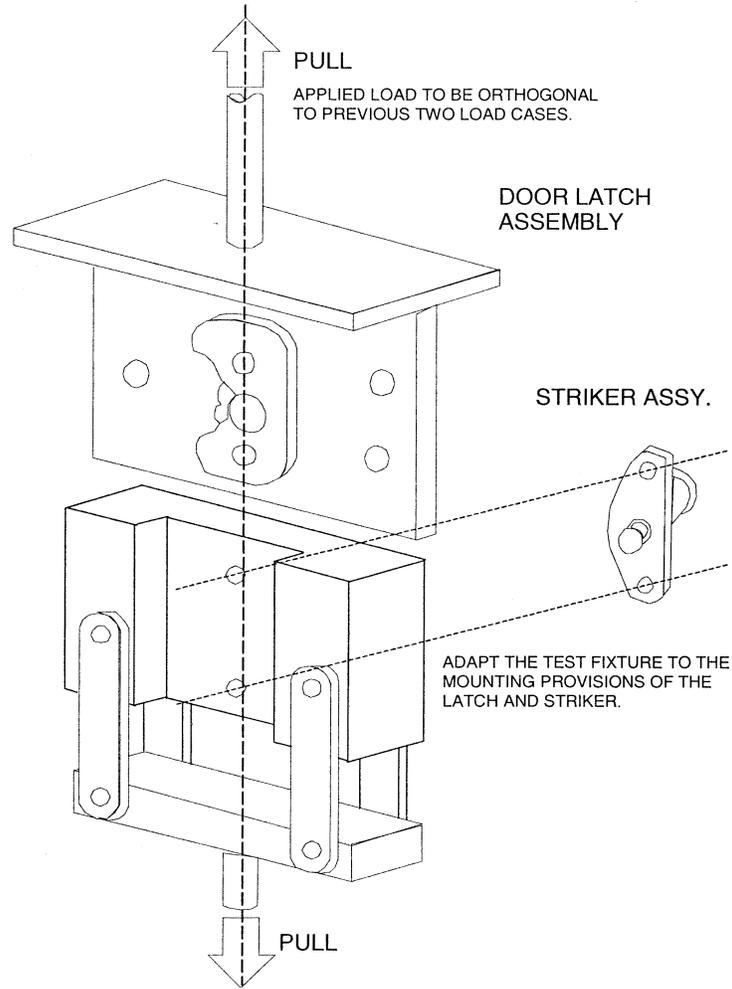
Door Latch – Tensile Testing Fixture for Load Test 3 (Back Doors Only)
